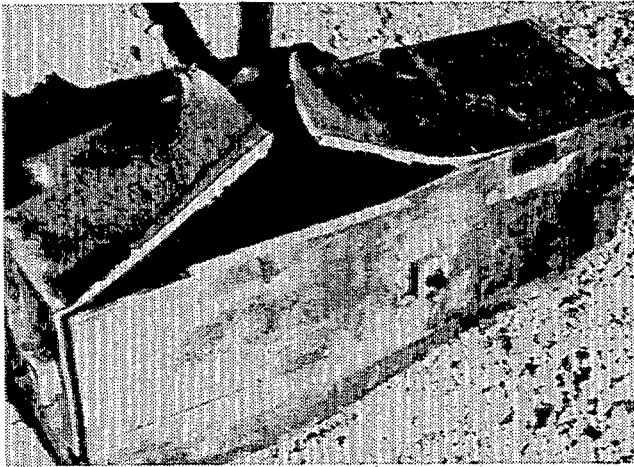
View of Aluminum ASTB Engine Compartment Fuel Cell Bottom and Rear Showing Weld Failures (Ref. 23)
